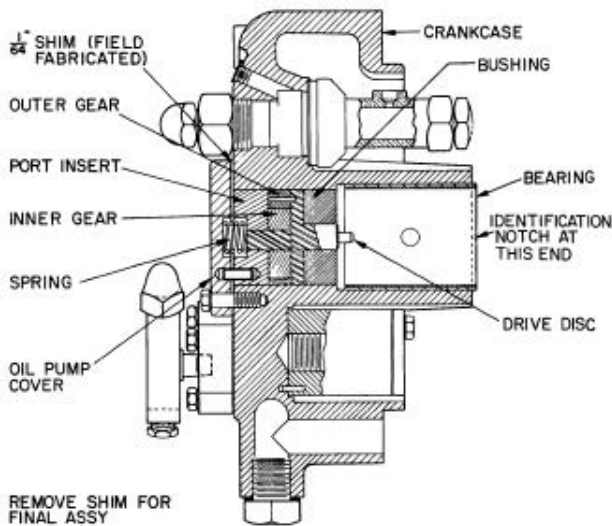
Setting Oil Pump Bushing (Typical 5H120, 126)
